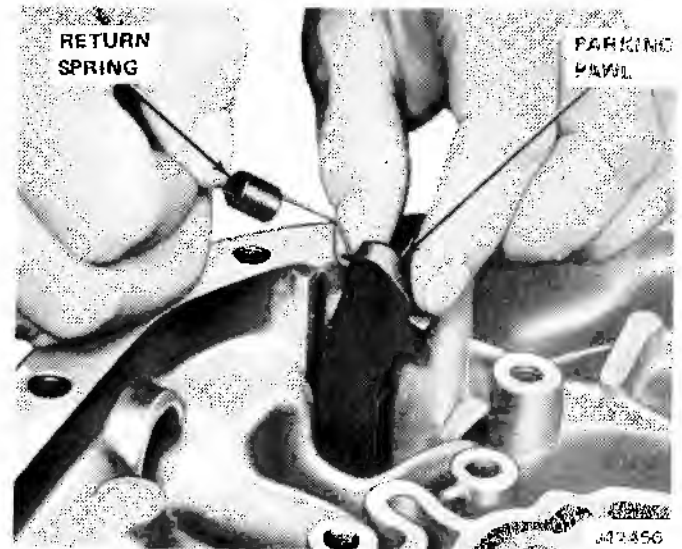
Removing-Installing Return Spring From Parking Brake Pawl
